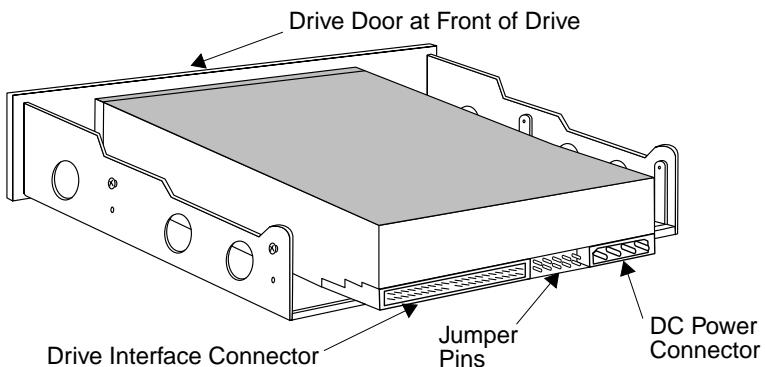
SyJet Drive Rear View (with mounting boot)
